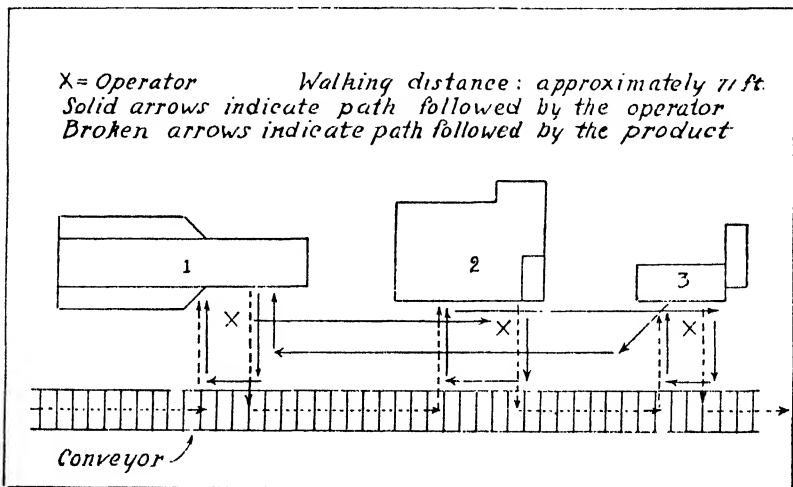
Arrangement of machinery in a straight line often makes it difficult for one operator to handle more than one machine, because of the necessity for excessive walking and materials handling.
